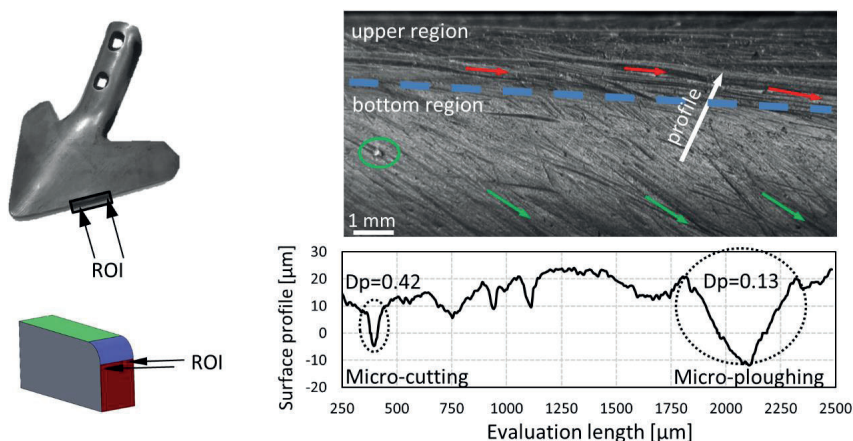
Macroscopy of tine cutting side surface and D_p extraction [21]
